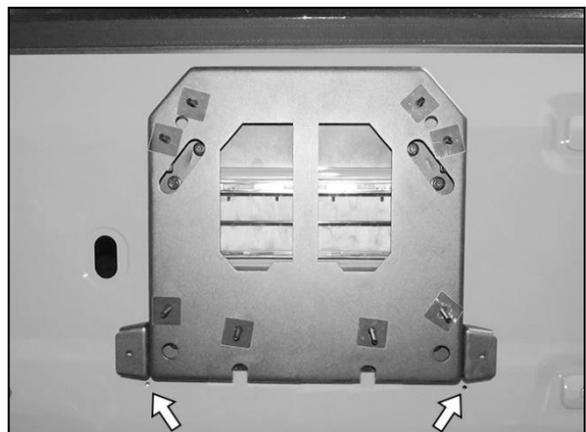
Thread the Plastic Retainers onto the Bolt Plates. Reuse the factory hardware to attach the Tire Carrier to the rear door
